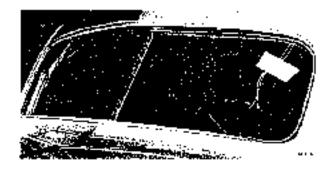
Installing Windshield Glass—Ends of Draw-string Toped in Place (1938-39 Models)
